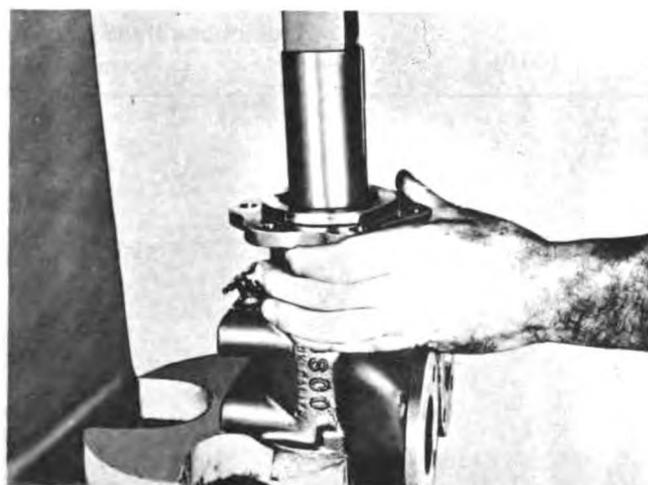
(N20809). Install The Oil Seal Into The Housing.
